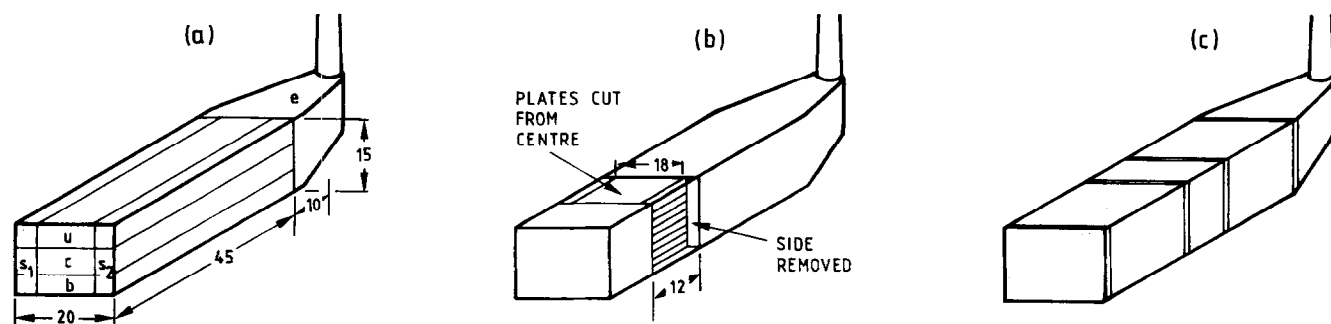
(a) Samples for the annealing test. The letters indicate the sample nomenclature and the lines represent the saw cuts; dimensions in mm. (b) Samples for X-ray diffraction measurements; dimensions in mm. (c) As (b), but samples cut perpendicular to the long axis of the bar.
